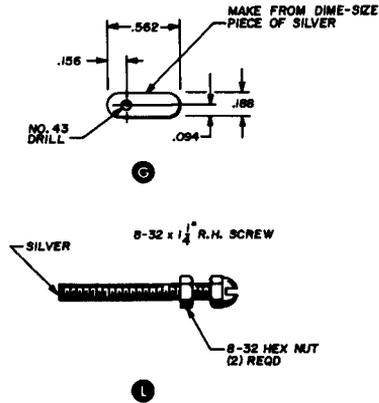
Silver contact G (two required) and contact screw L. Sufficient scrap should be left after making the silver contacts to make a silver contact for the contact screw. Cut a piece to size, solder to the end of the screw, and trim to size with a fine file.
